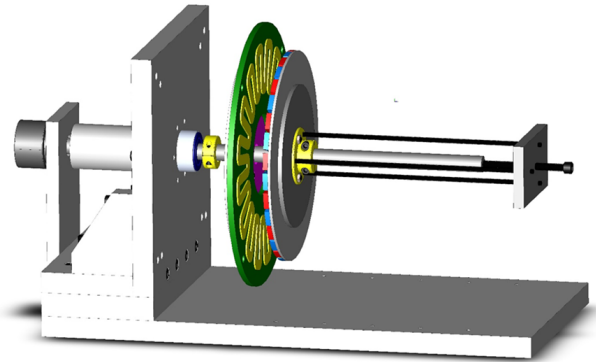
Customized test fixture with the coreless machine with PCB stator installed.
